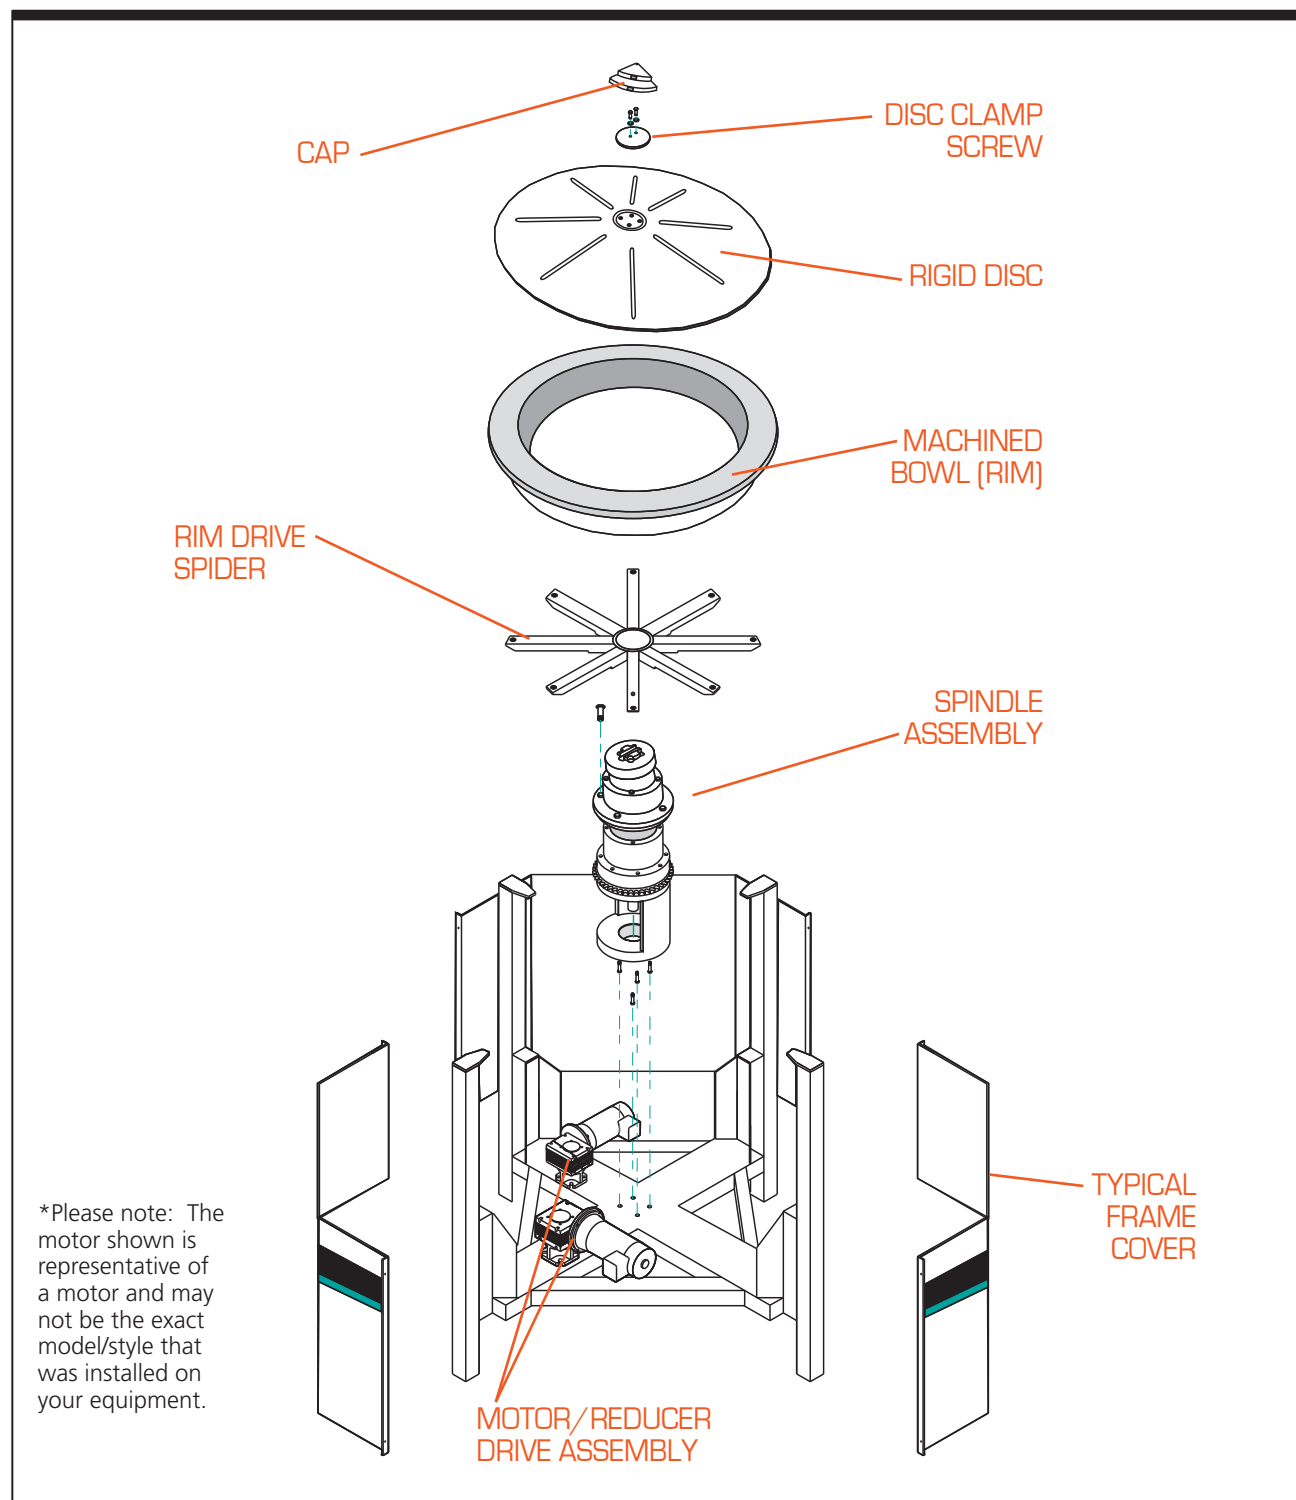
Typical FT-Series Dual Drive Feeder - Exploded View
